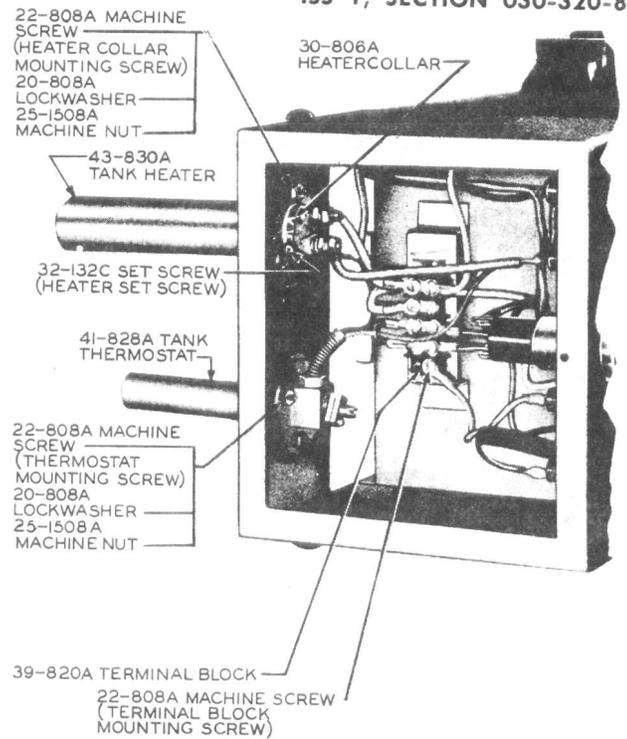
Tank Heater, Thermostat, and Associated Parts (Control Panel Removed From Processor)
